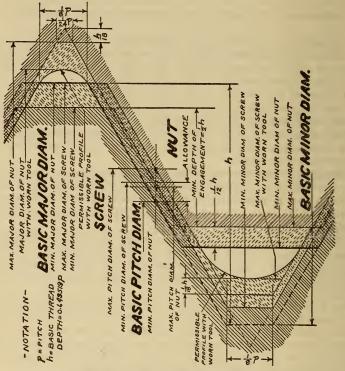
Illustration of tolerances, allowance, and crest clearances for class 5, wrench fit for threaded studs
